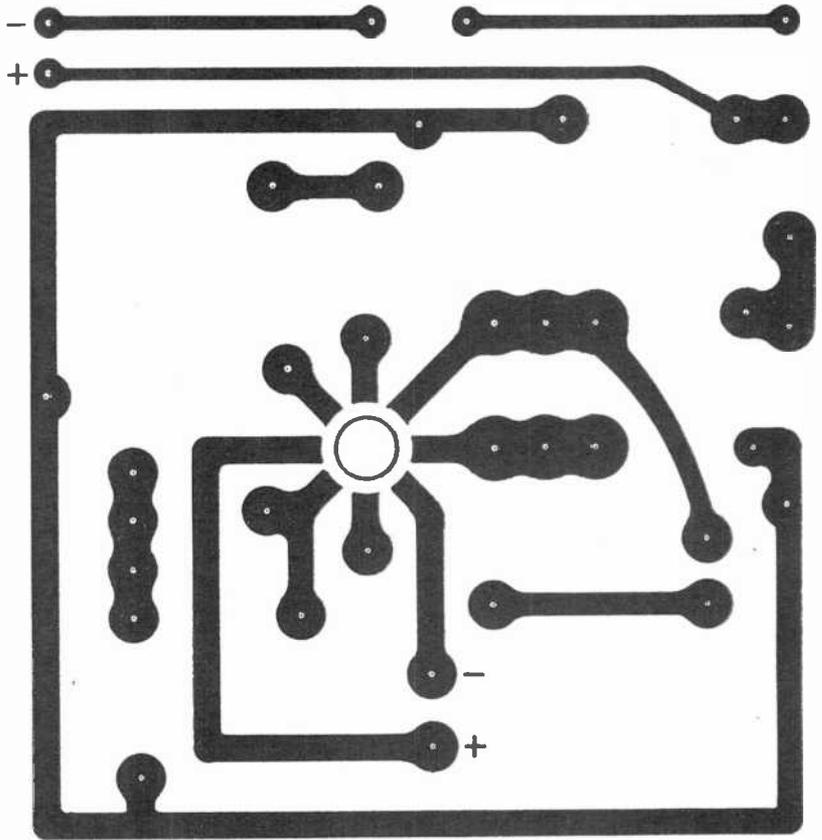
Actual-size printed board foil layout. You can create this circuit on perf board if desired.
